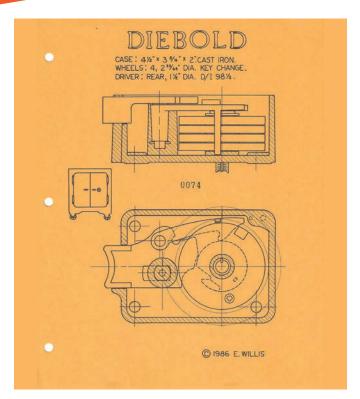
The author used this Ed Willis drawing of the Diebold lock. ©MBA USA, Inc. Used by permission.
